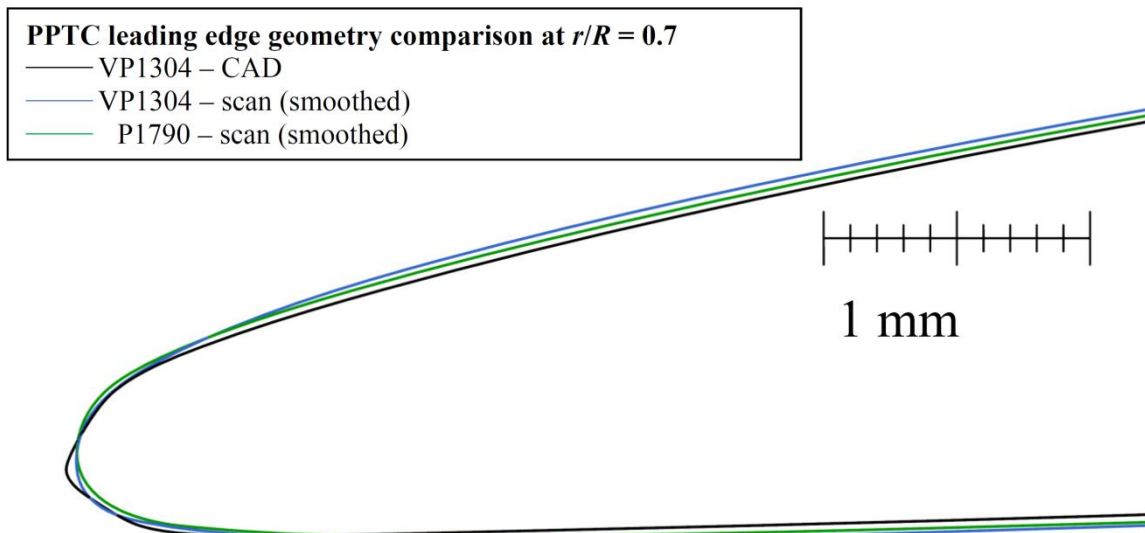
Leading edge geometry at $r/R = 0.7$, propellers VP1304 and P1790
